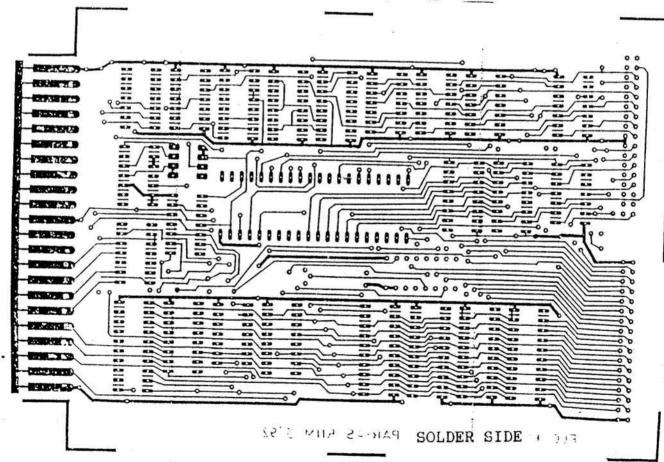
FIG. PCB LAYOUT OF FLOPPY DISK CONTROLLER CARD 21
